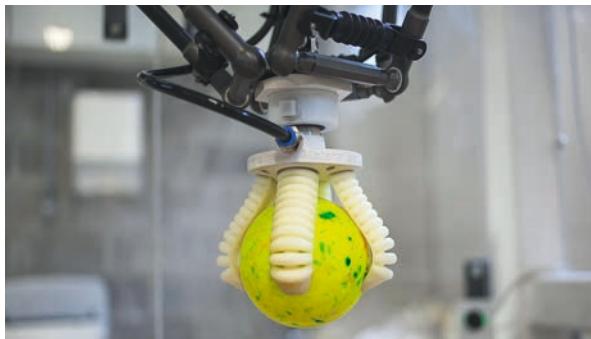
Elastomer gripper grips round workpiece (source: gripper Materialise<sup>68</sup>)
